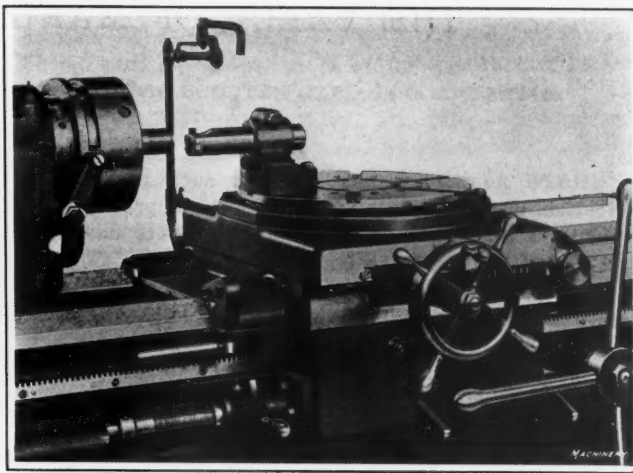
Flat Turret Lathe built by Acme Machine Tool Co. equipped with Thread-chasing Attachment
